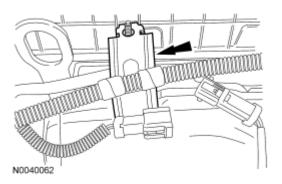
Locating Wiring Harness Bracket Courtesy of FORD MOTOR CO.
